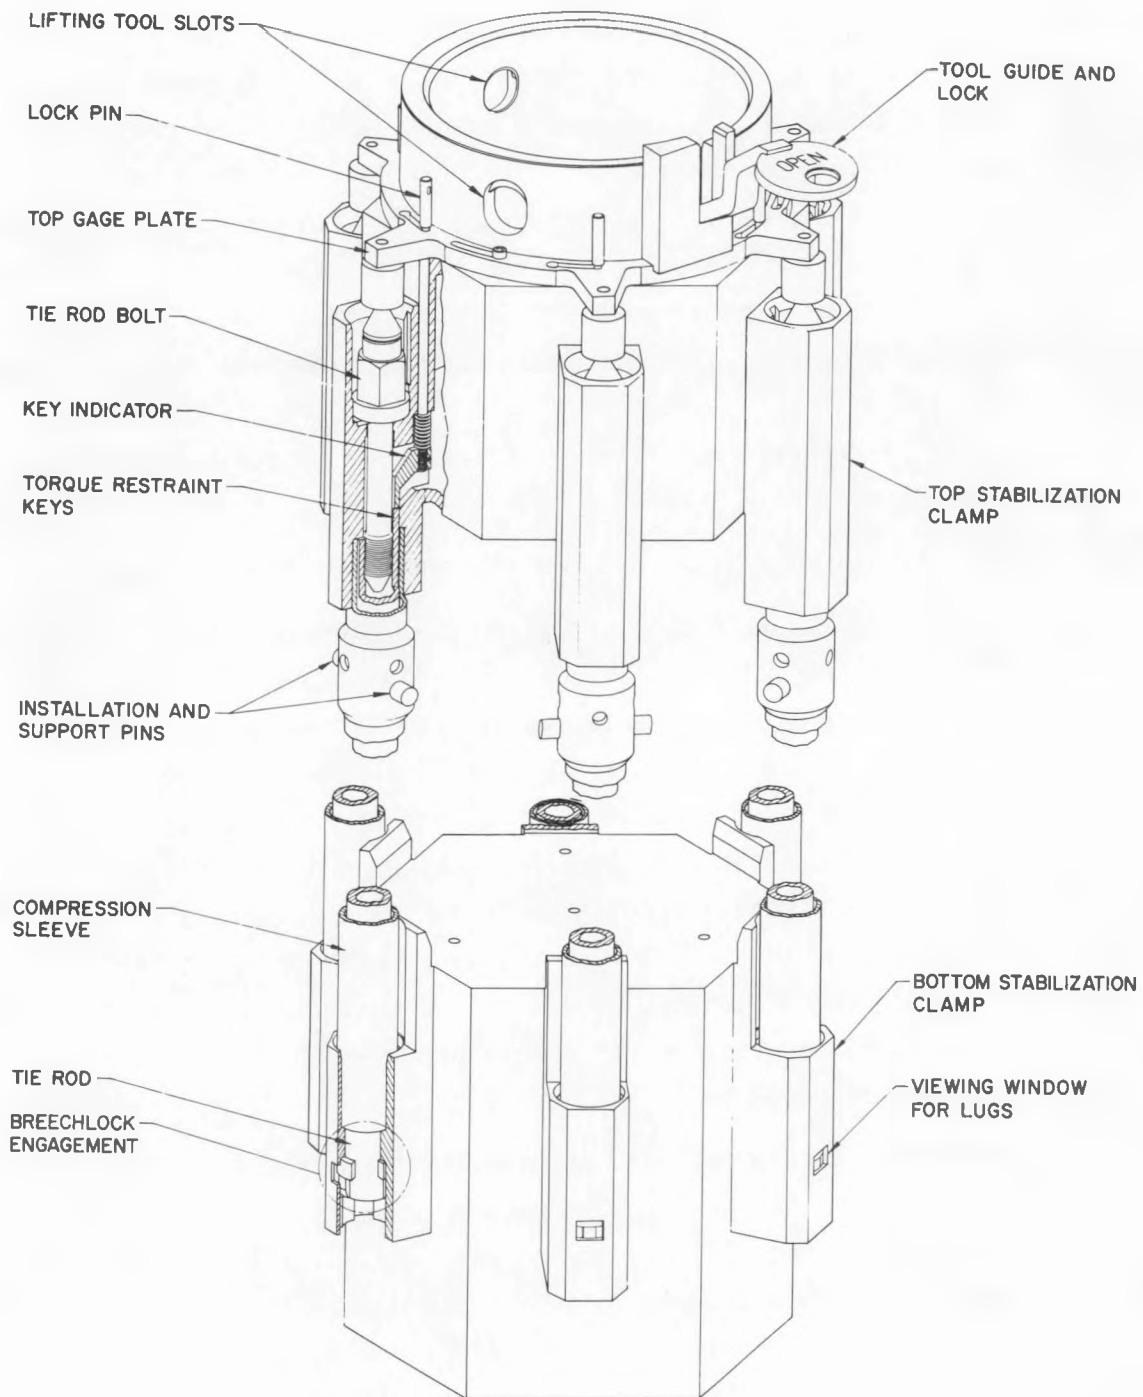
LWBR Seed Module Stabilization Clamp Assembly
